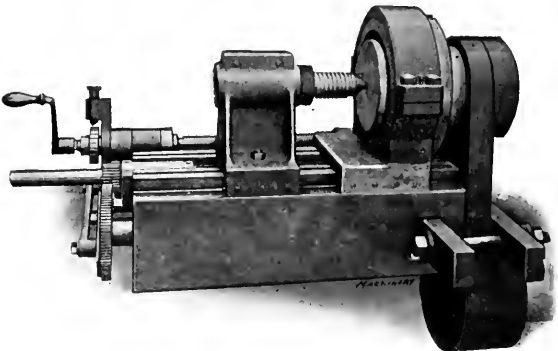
Pedrick Machine set up for truing a Side Crankpin
